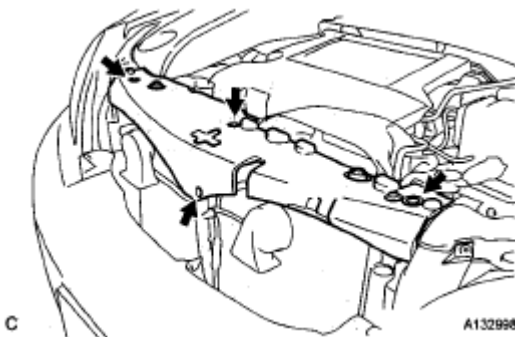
Identifying Cool Air Intake Duct Seal Clips
